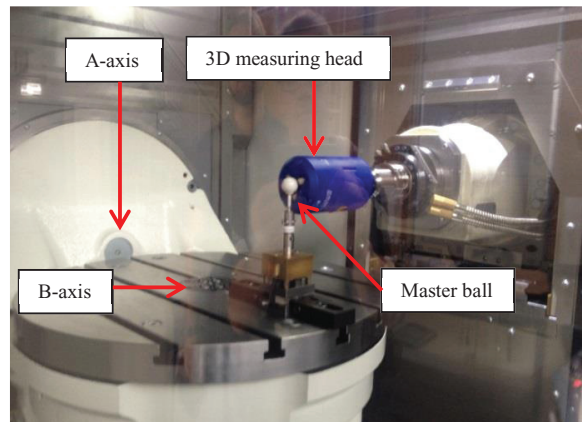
Rotary Inspector measurement setup on a five axis milling machine.
